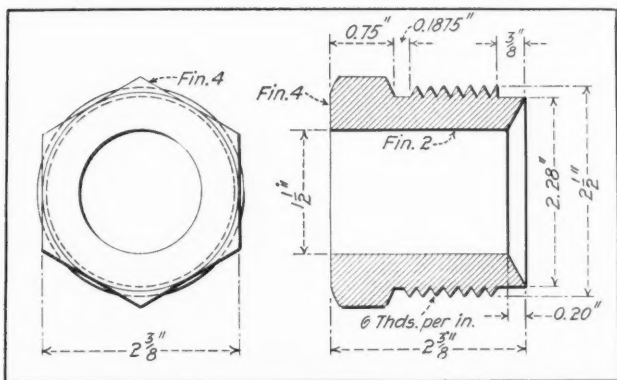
System of Indicating Finished Surfaces, applied to a Drawing.
